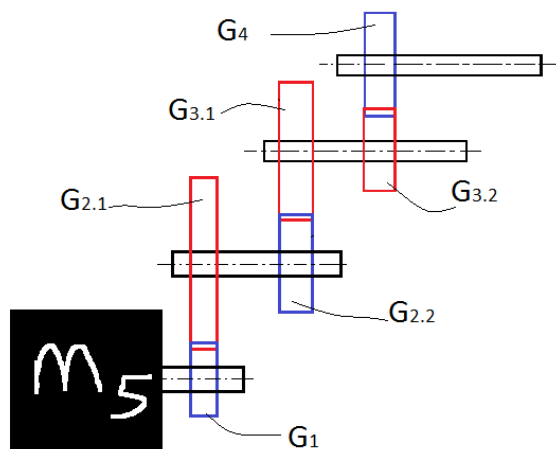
Schematic of spur gears gearbox of rotating rear wheel
